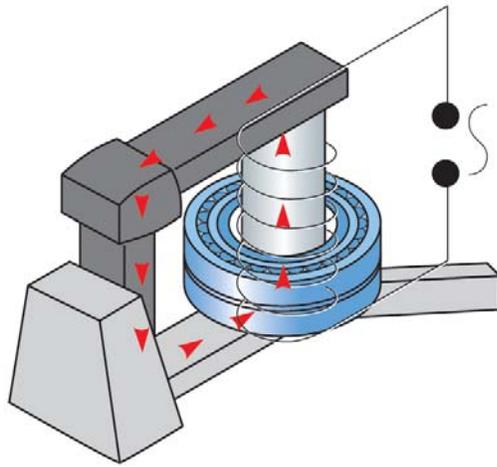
Induction heaters rapidly heat the bearing by creating current in the bearing rings (Courtesy of SKF, 2011, *SKF Maintenance and Lubrication Products*, © SKF Group)
